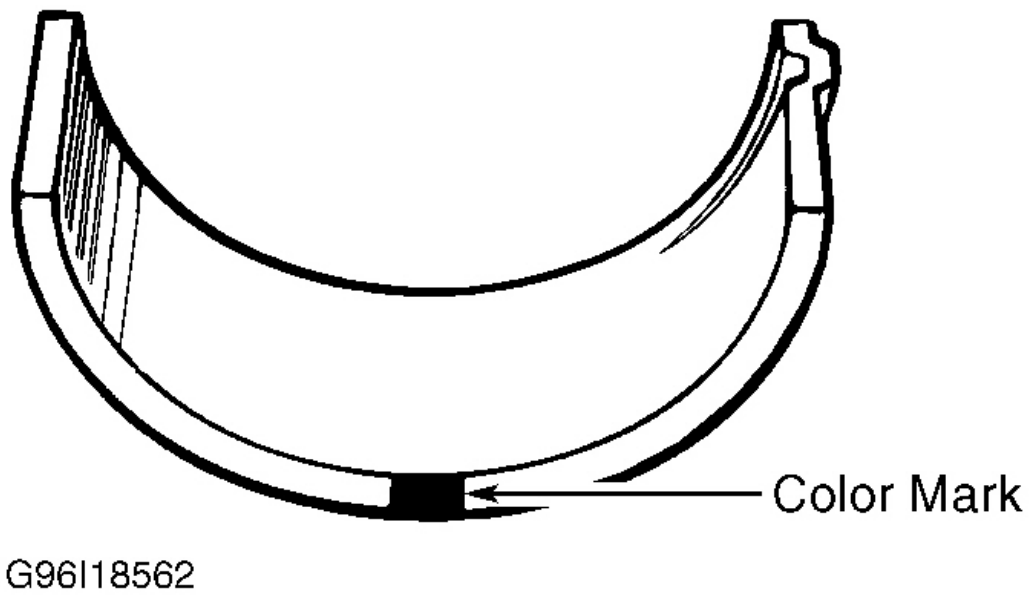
Identifying Main Bearing Color Codes - Standard Bearing
